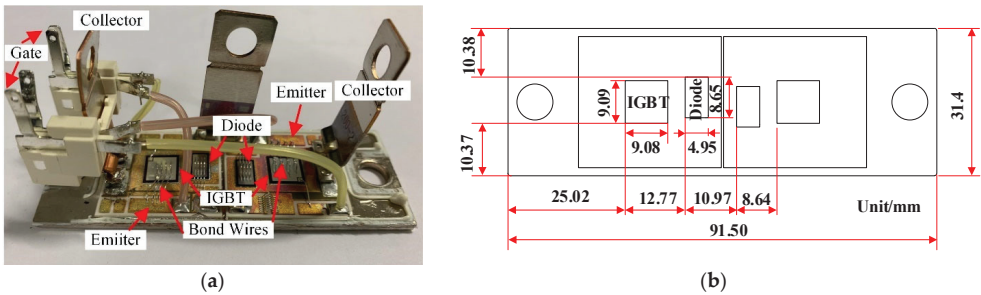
(a) IGBT module GD50HFL120C1. (b) Dimensions of GD50HFL120C1.
